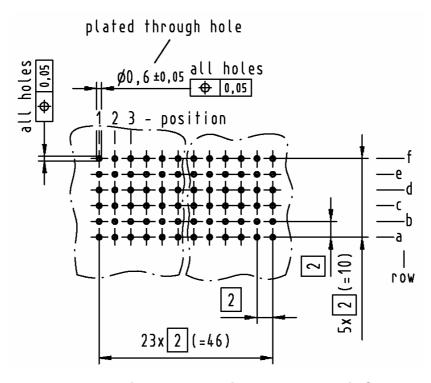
Layout Drawing For 144 Pin Male Press-Fit Connector Without
